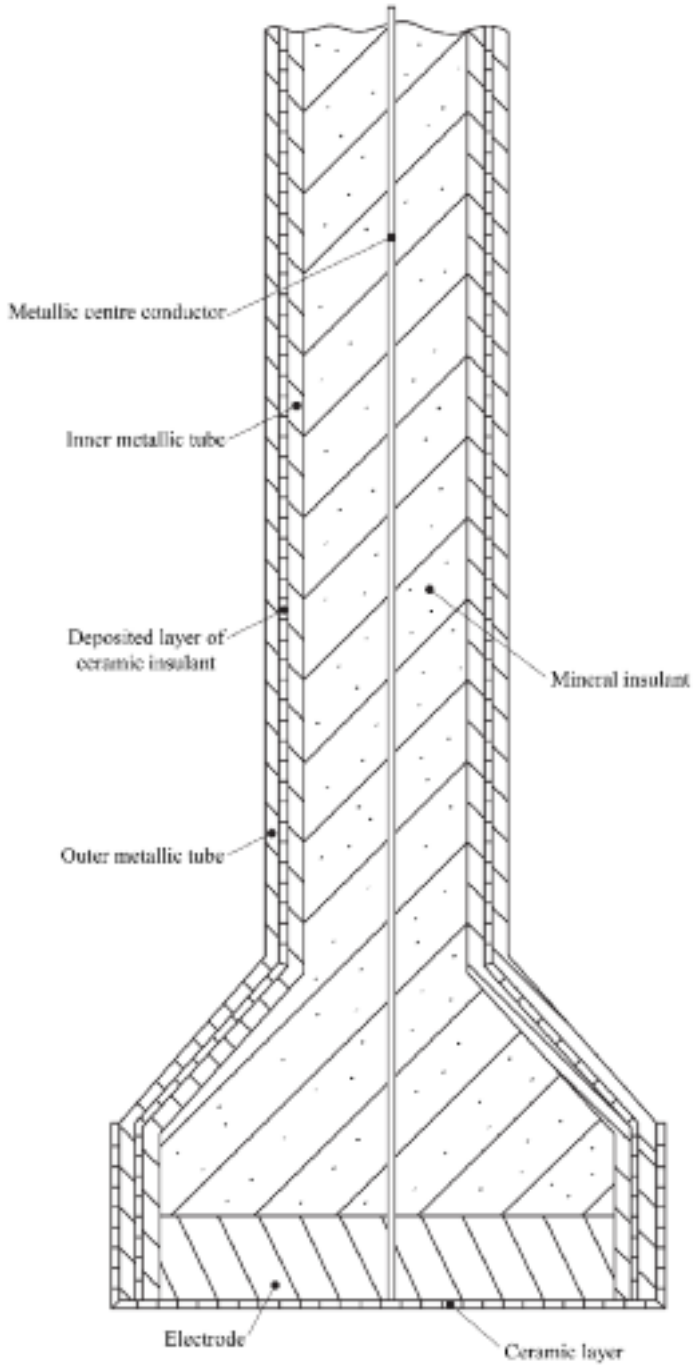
Schematic section through the composite sensor and tri-axial cable.
